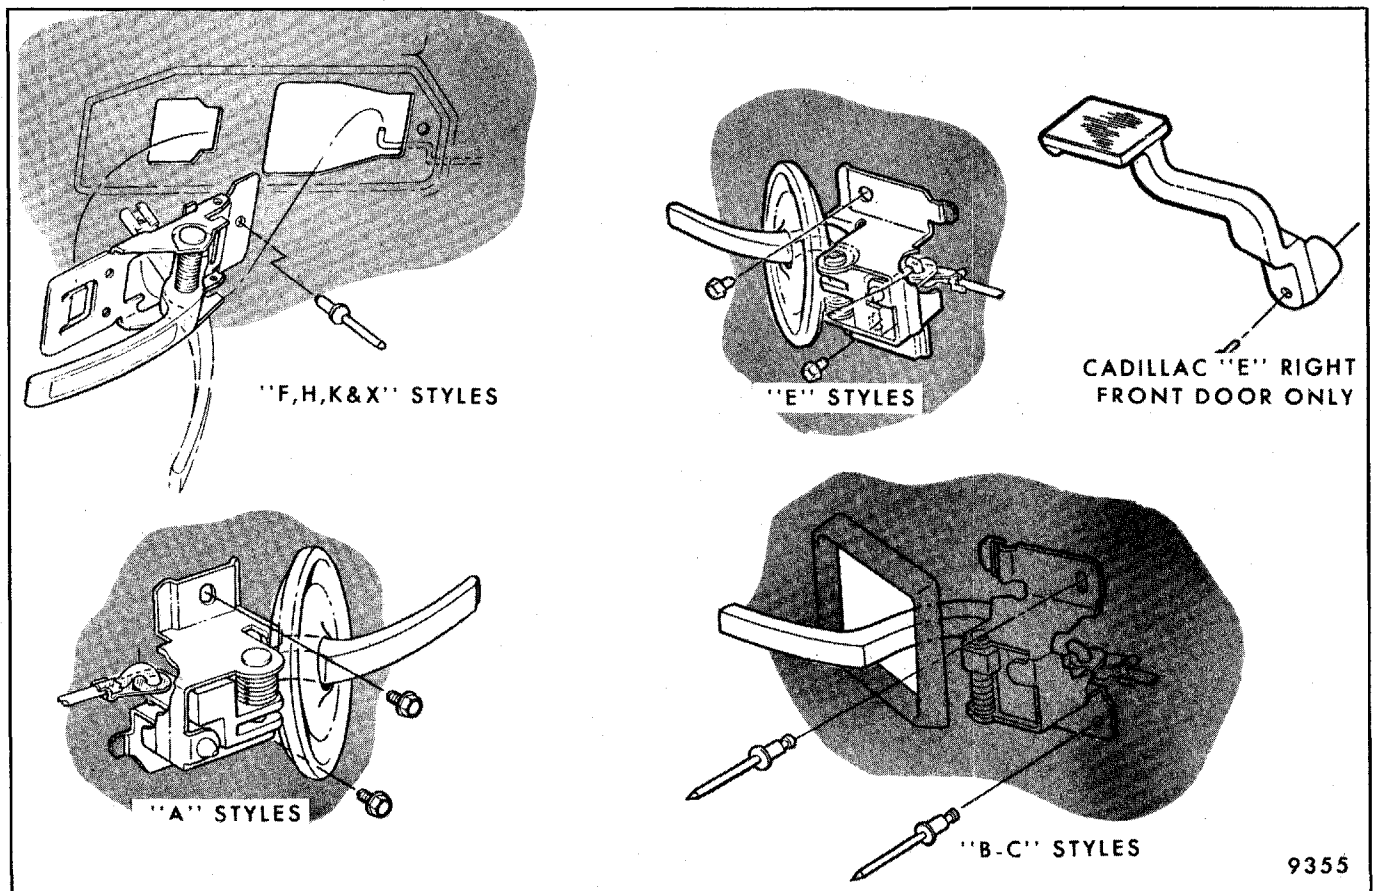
Typical Door Lock Remote Control Handle and Cover Plate Installations
